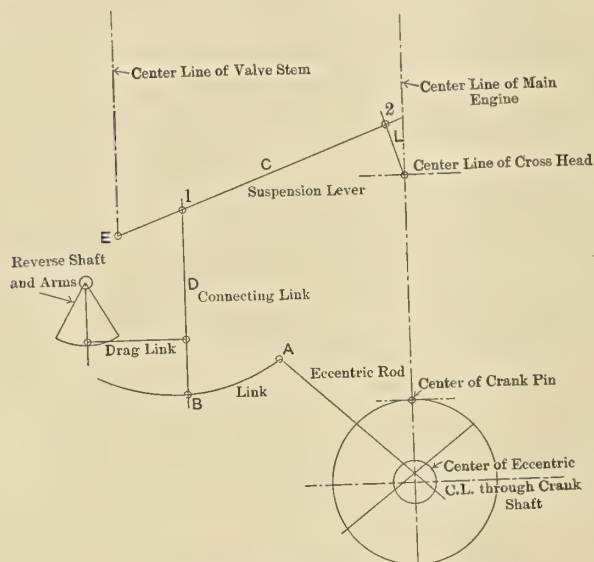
SKETCH OF WALSCHAET VALVE GEAR
